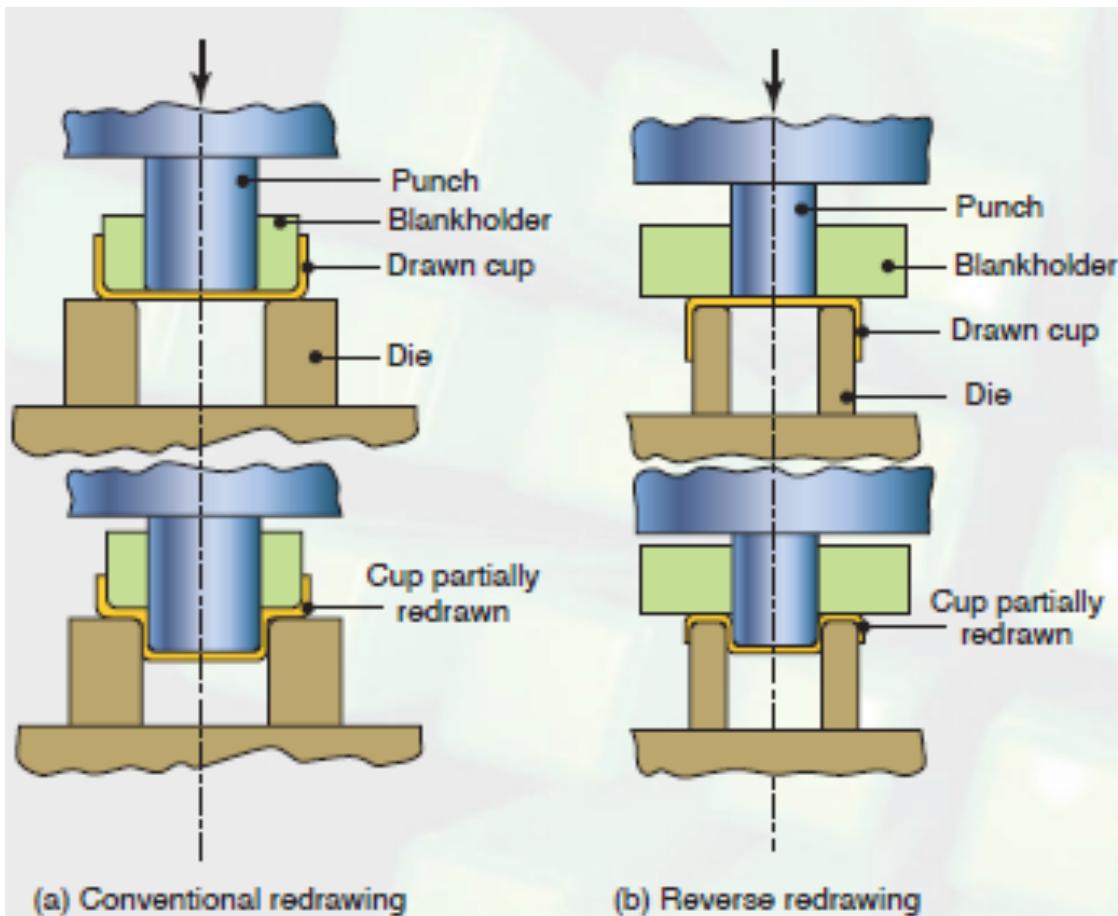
Reducing the diameter of drawn cups by redrawing operations: (a) conventional redrawing, and (b) reverse redrawing. Small-diameter deep containers may undergo several redrawing operations.
